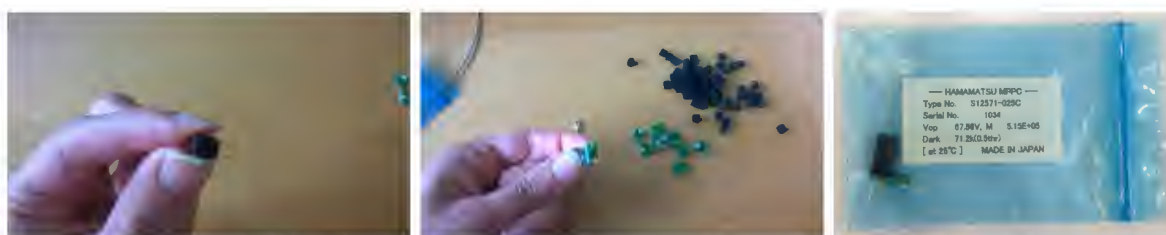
Pre-assembly of the MPPCs and optical connectors.
